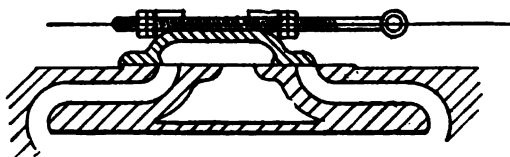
Slide Valve of a Steam Engine, showing position after cut-off of steam from right-hand end of cylinder, the exhaust continuing full from the left-hand end.
